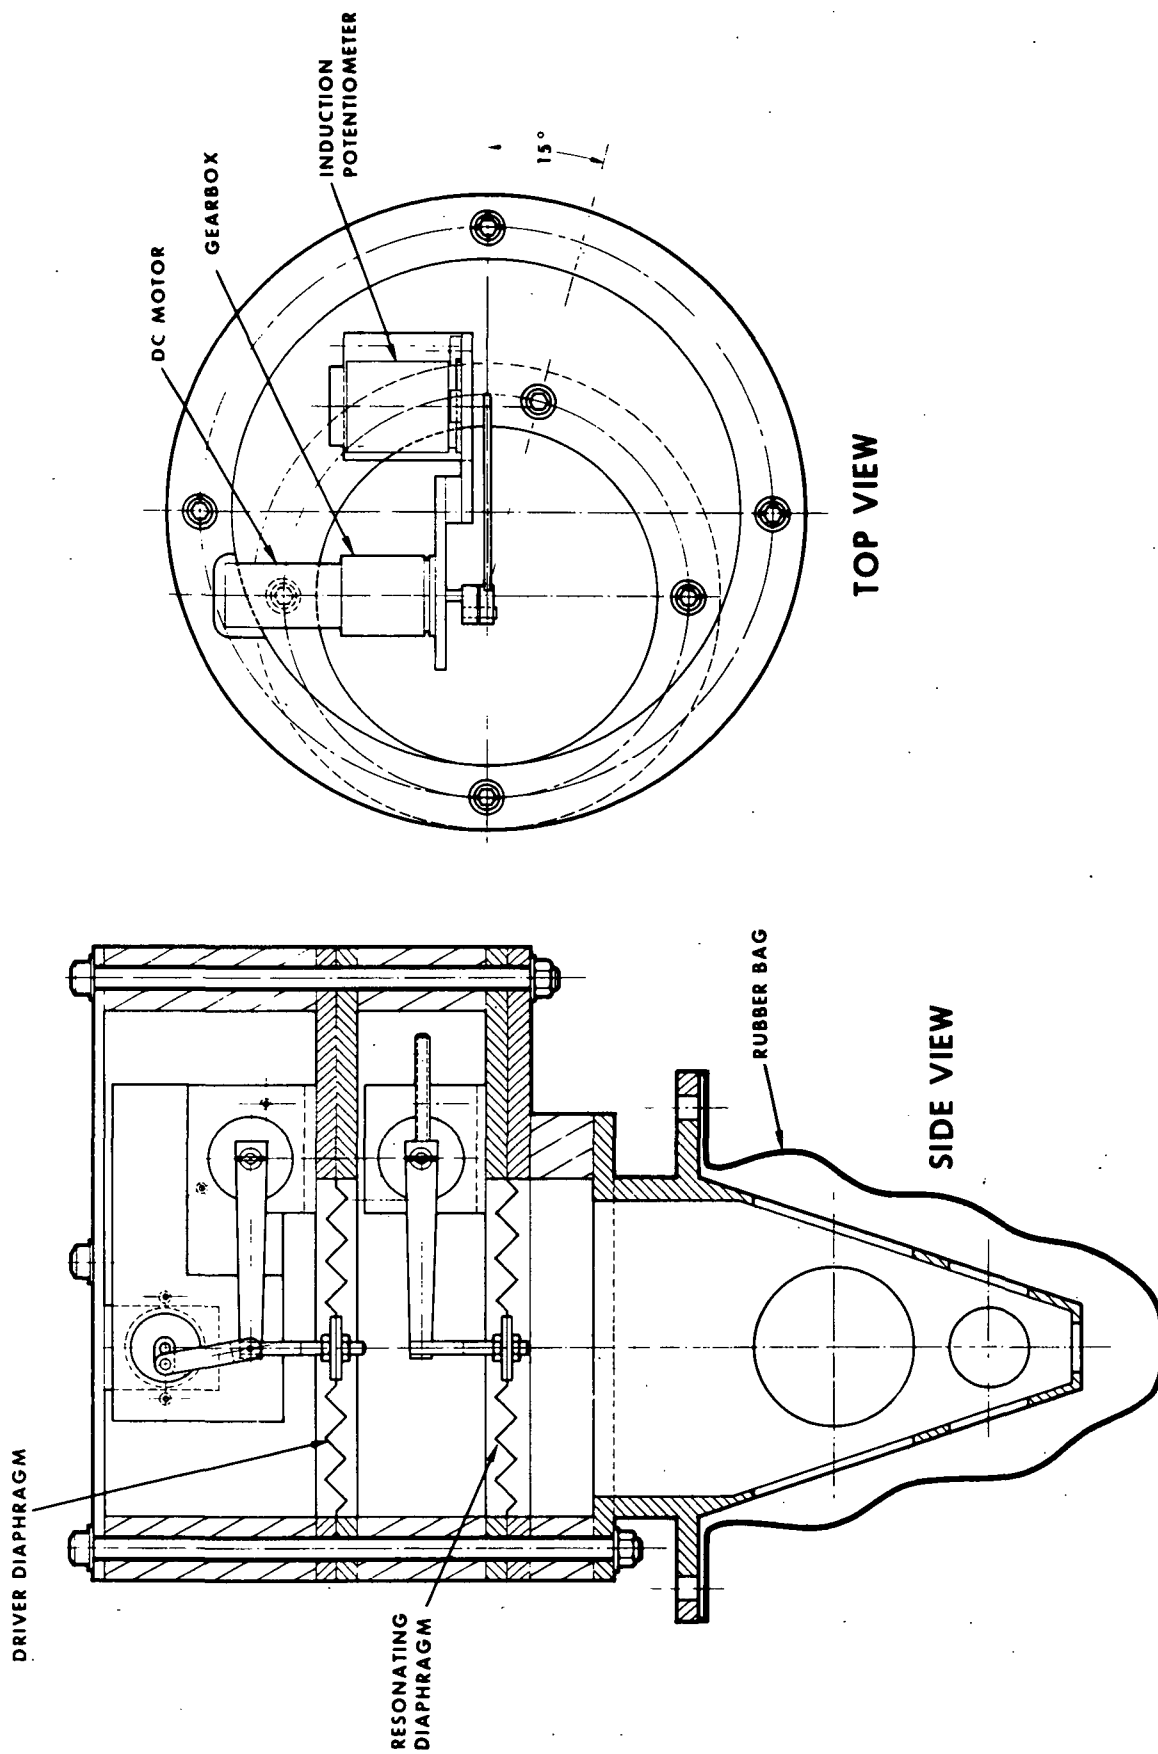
RIGS Sensor Assembly Drawing (First Sensor)
